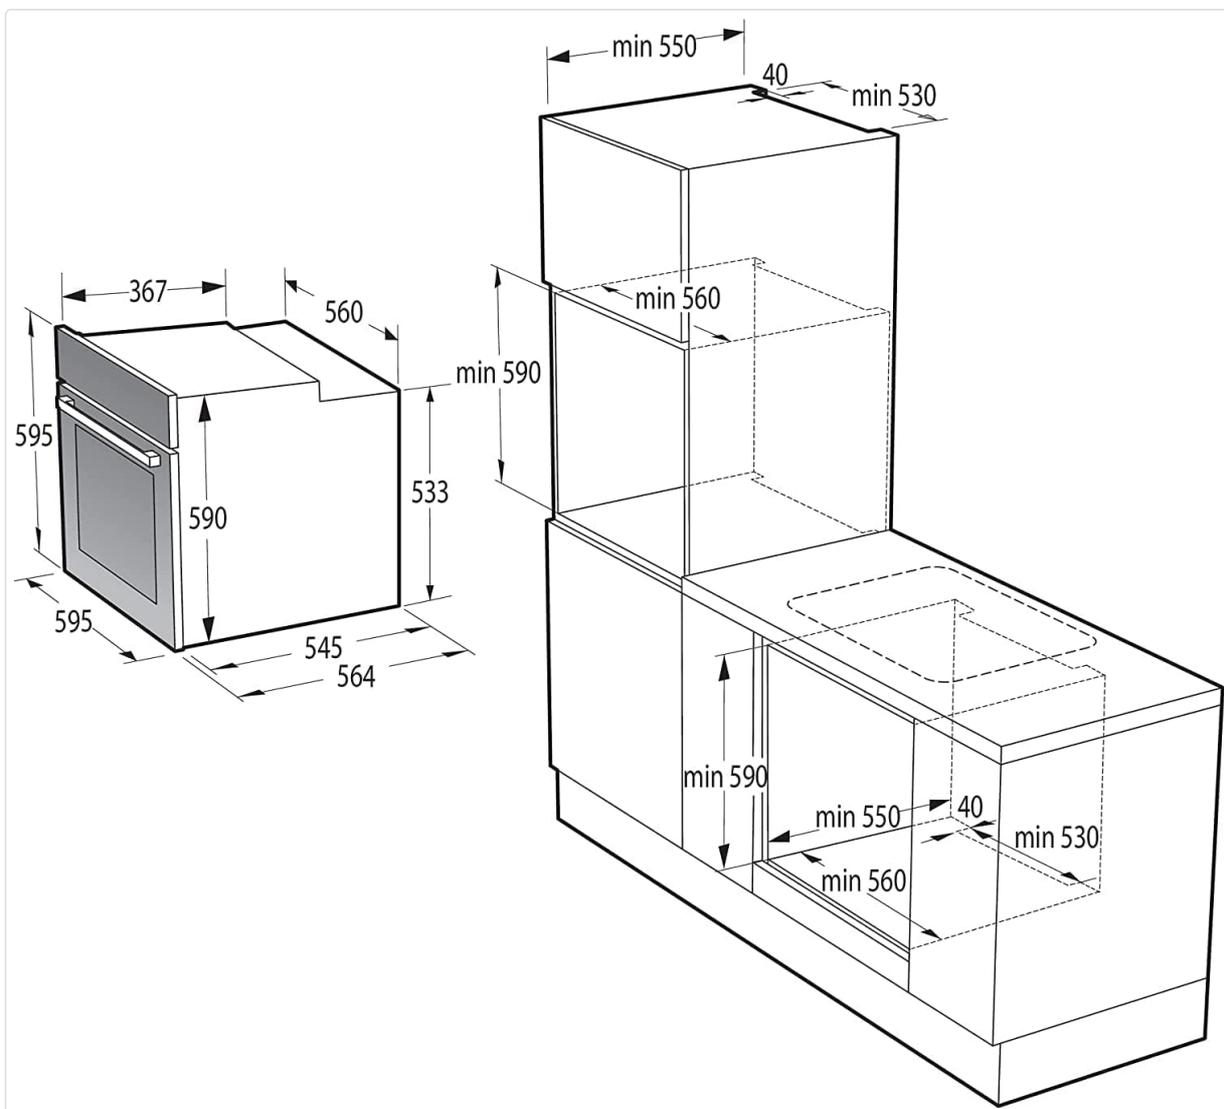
Oven dimensions and recommended cabinet cutout for installation. Dimensions are in millimeters.
